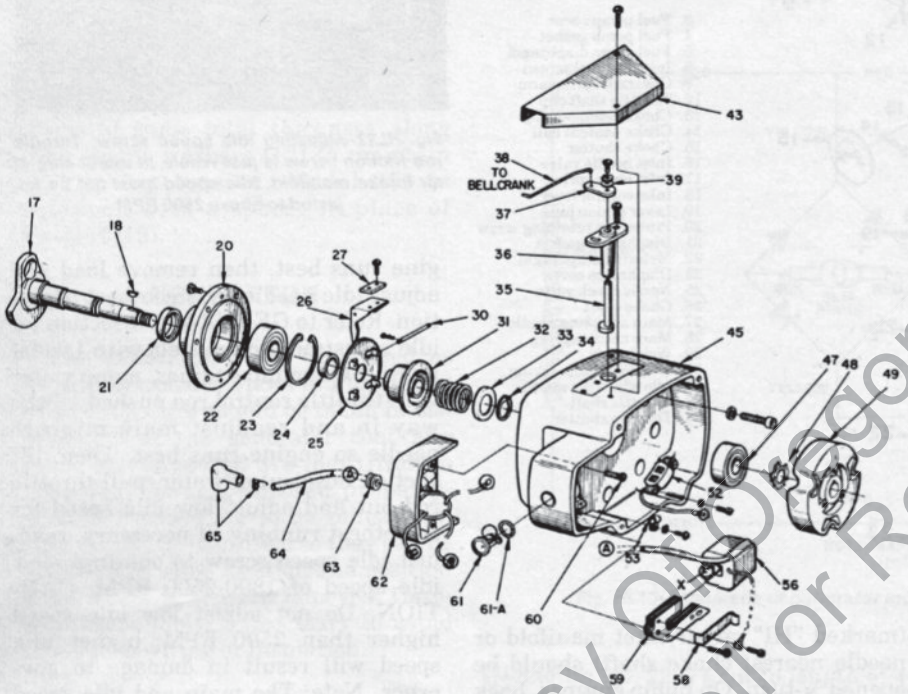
Exploded view showing magneto end of crankshaft (17), governor and magneto assemblies. The housing (45) retaining socket head screws can be removed by working through notches in outside of magneto rotor (49) allowing all parts to be removed as a unit after removing governor linkage and disconnecting spark plug wire.
